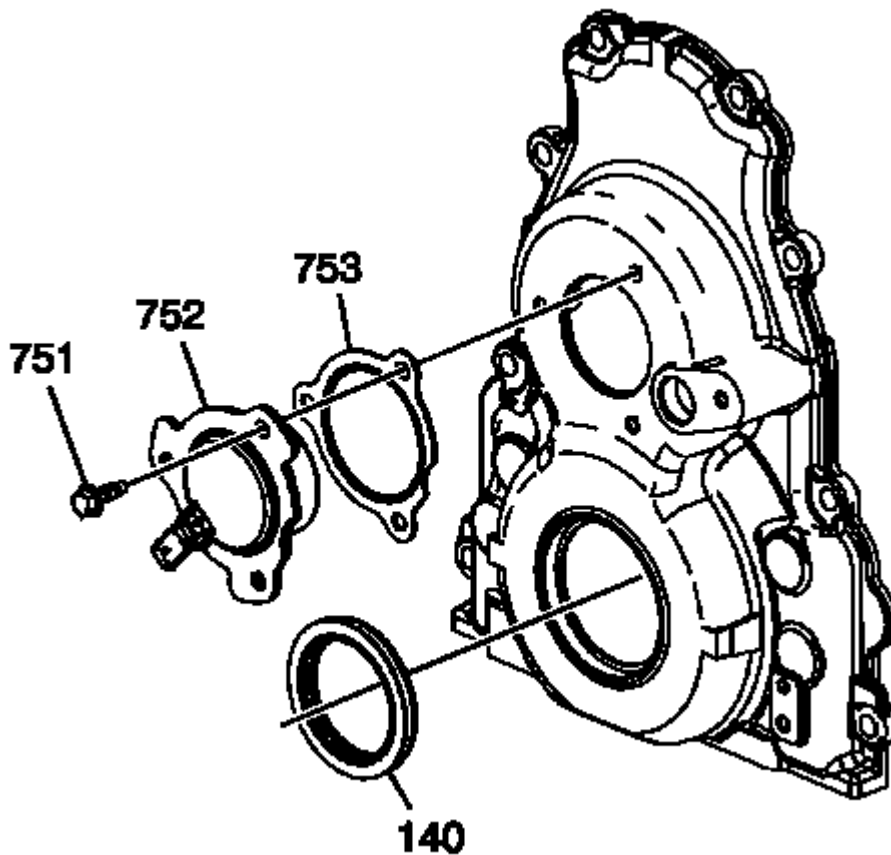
CMP Actuator Magnet, Bolts, Gasket And Oil Seal
